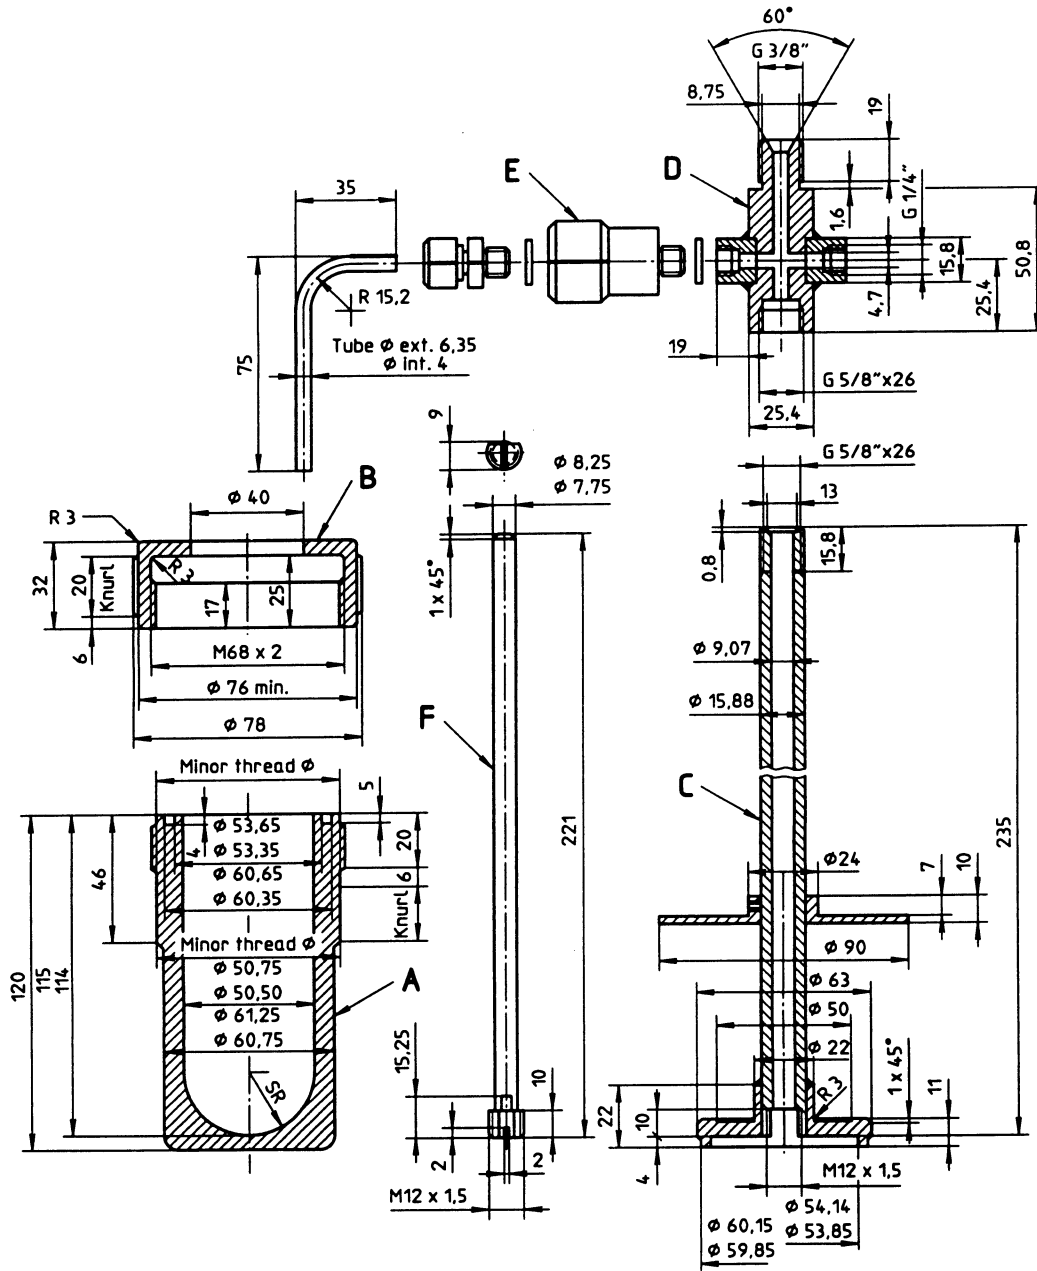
Oxidation bomb and burst-disc assembly (end)
